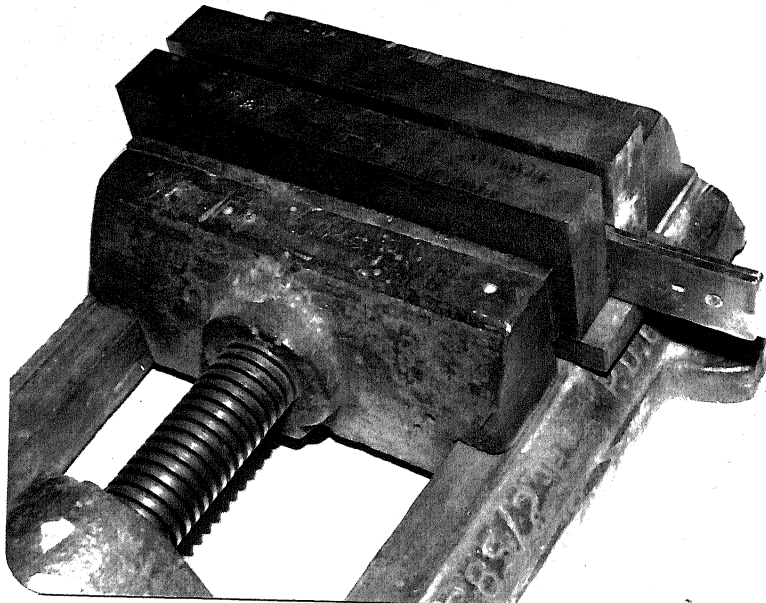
Photograph of crack sharpening fixture
